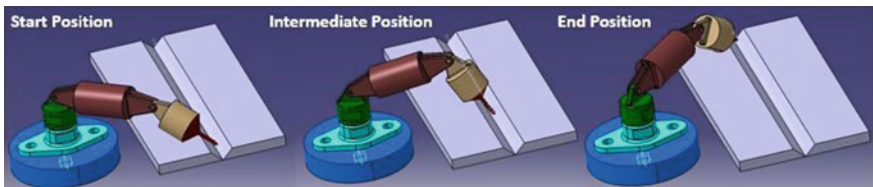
Robot following seam path for performing welding operation of butt joint
